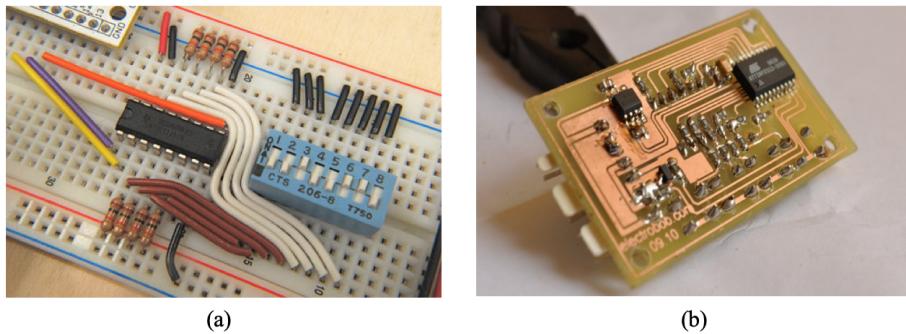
Wire location of a Breadboard (a) and a PCB (b)
